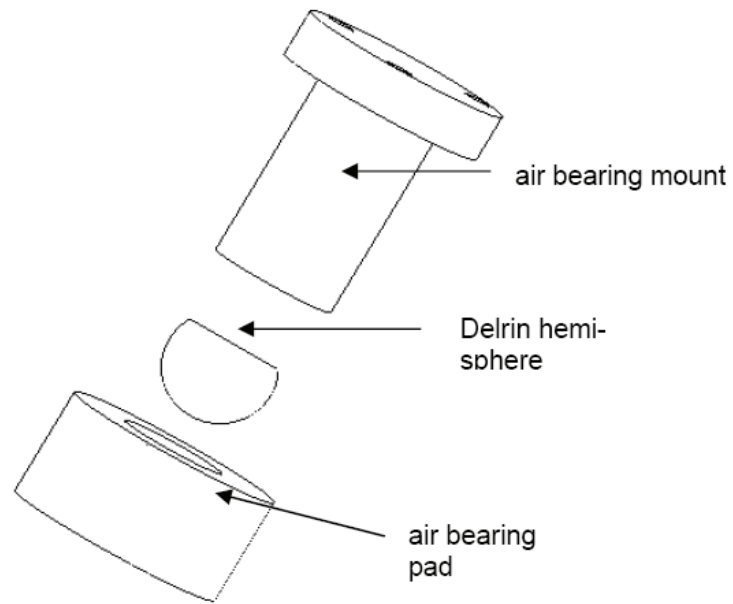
Assembly of the aerostatic bearing mount [1]
